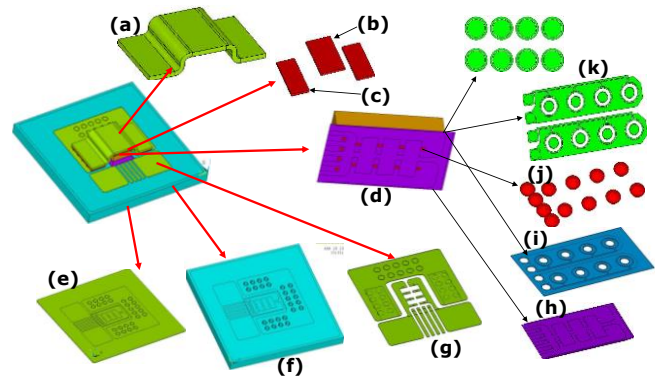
Components of package structure (a) Copper foil, (b) solder layer between copper foil and die, (c) solder layer between copper foil and PCB, (d) chip package, (e) copper layer on the bottom of the FR4 PCB, (f) FR4 PCB, (g) copper layer on top of the FR4, (h) underfill layer, (i) polyimide layer, (j) solder bump, and (k) aluminium metal layer (metal 1 and 2)
